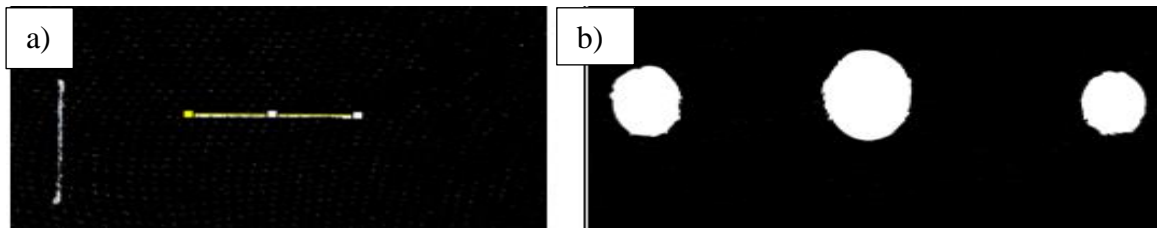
F4 for four-point analysis a) colour defect; b) hole defect
